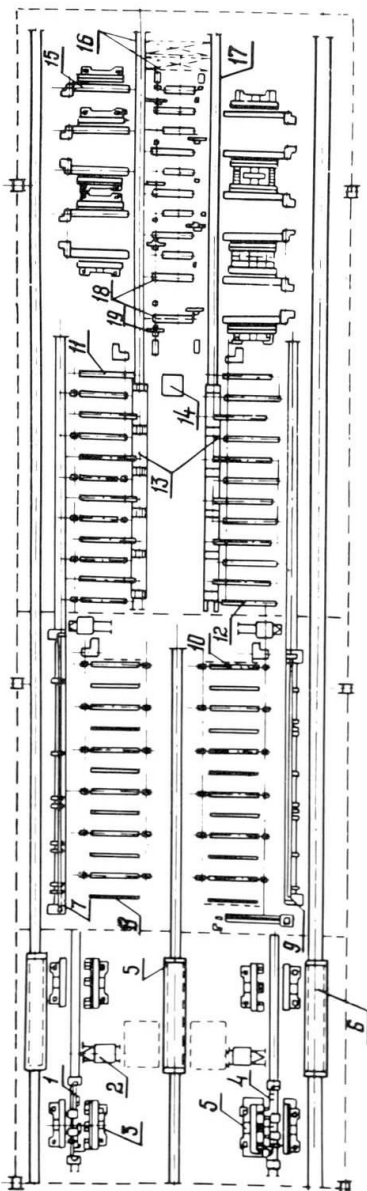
Lay-out of flow line for assembly and welding of roof-trusses made of angles:
